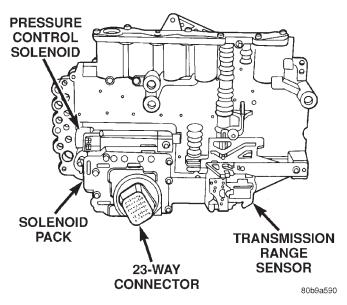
SOLENOID AND PRESSURE SWITCH ASSEMBLY
